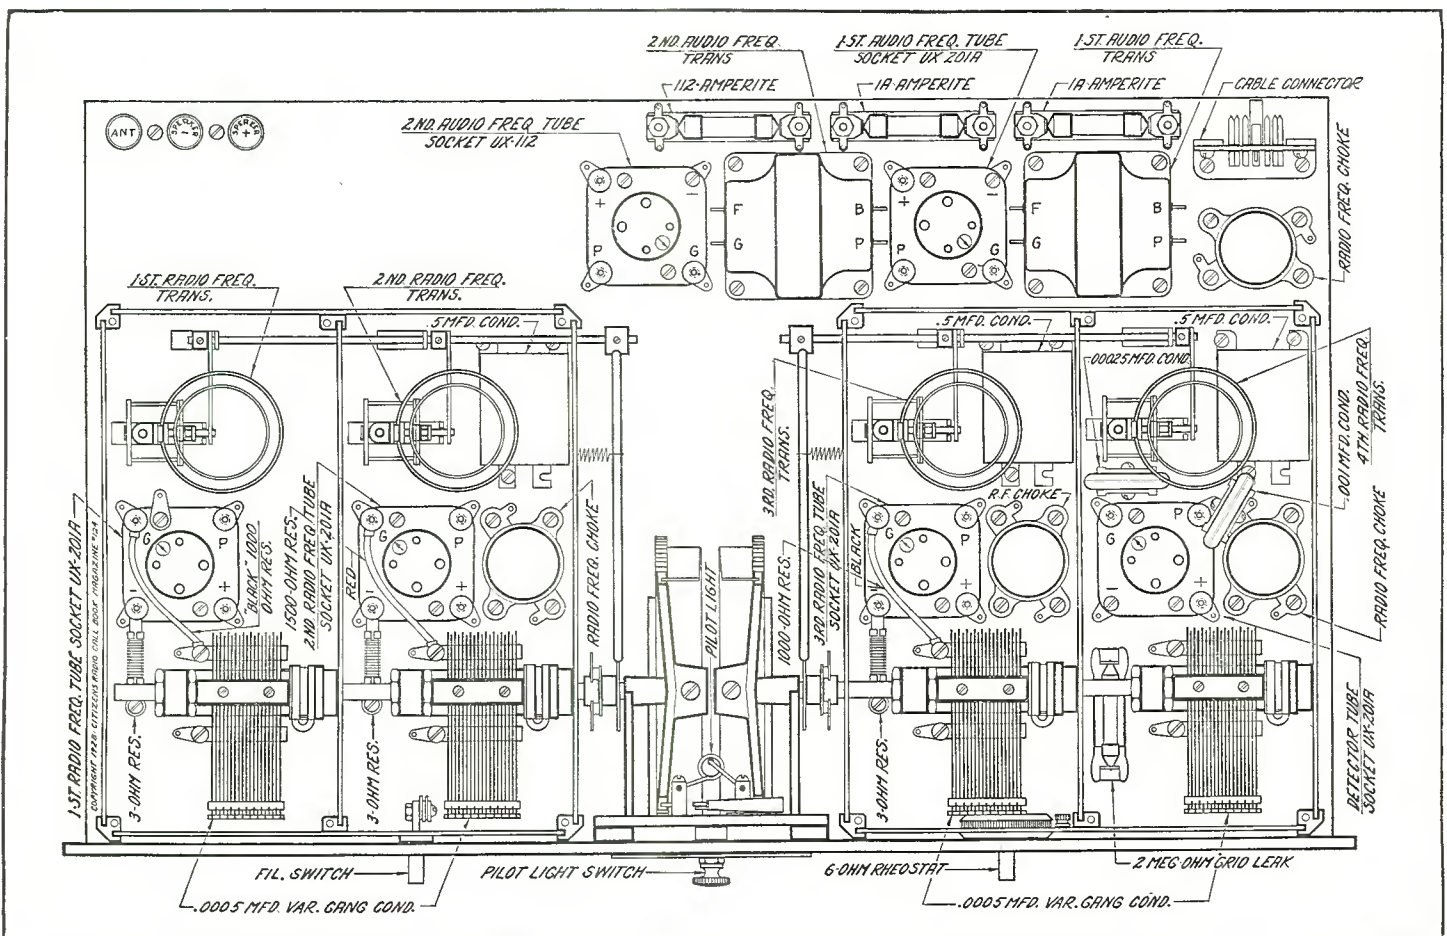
All parts of this receiver should be laid out in strict accordance with the sub-panel drawing shown above. Inasmuch as a suitable drilled steel chassis is provided in the foundation kit, it is only necessary to place all parts in their proper location and then begin the wiring of the receiver
